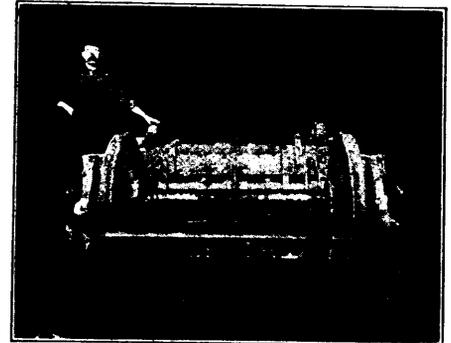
TROLLEY TRUCK FRAME WELDED WITH THERMIT.
